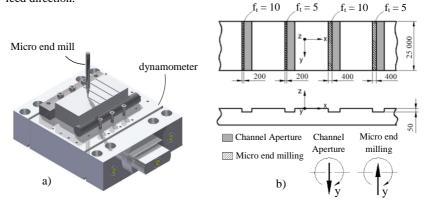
Machining strategy: a) wokpiece fixture; b) cutting tests sequence.
